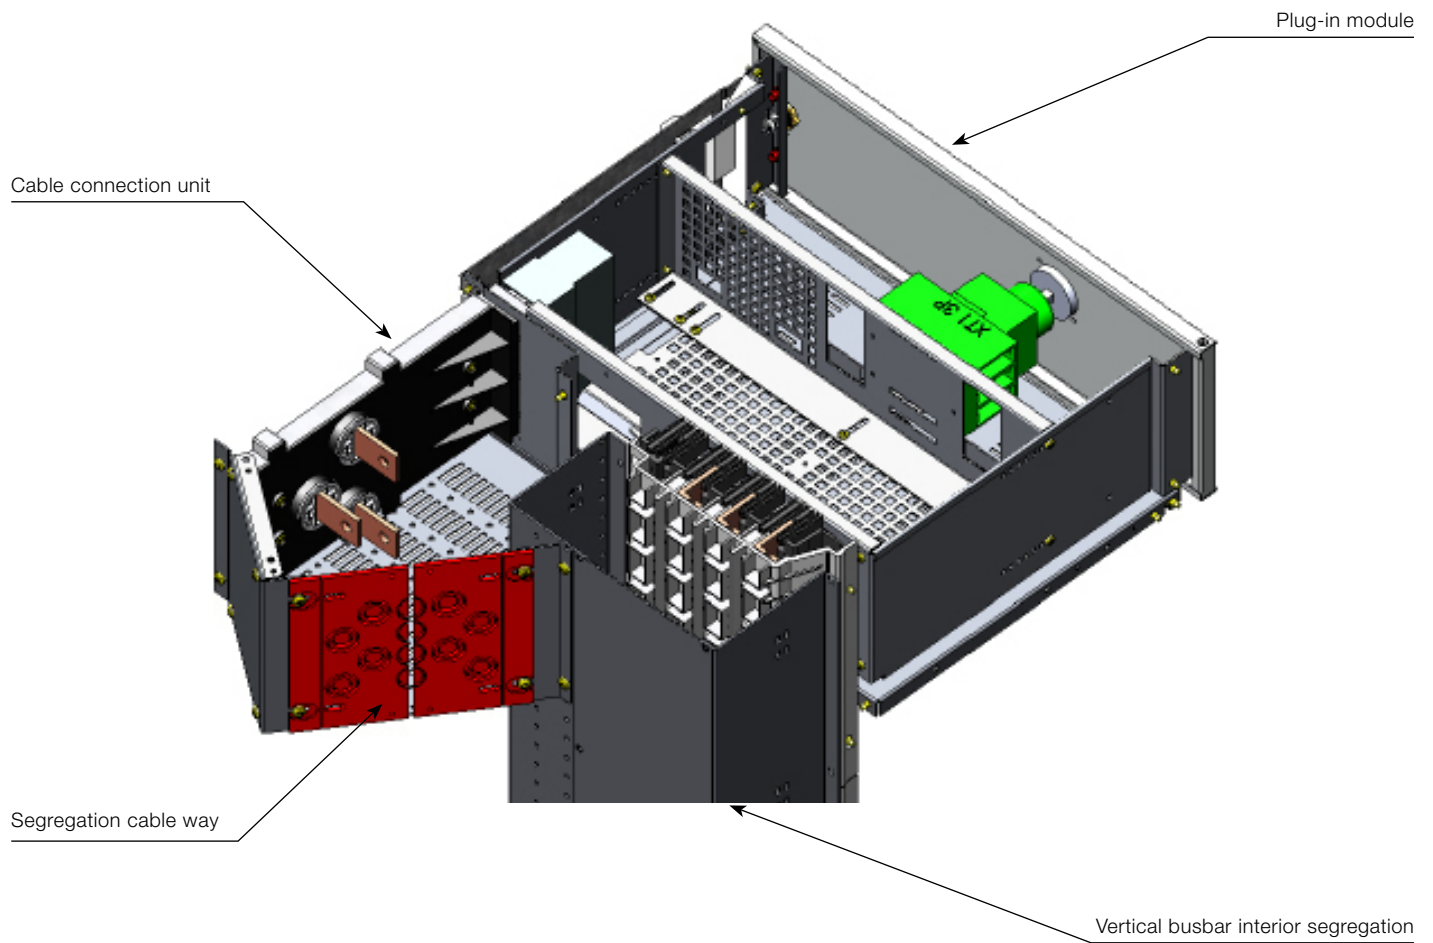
Typical cable connection for plug-in modules and Mcc modules
